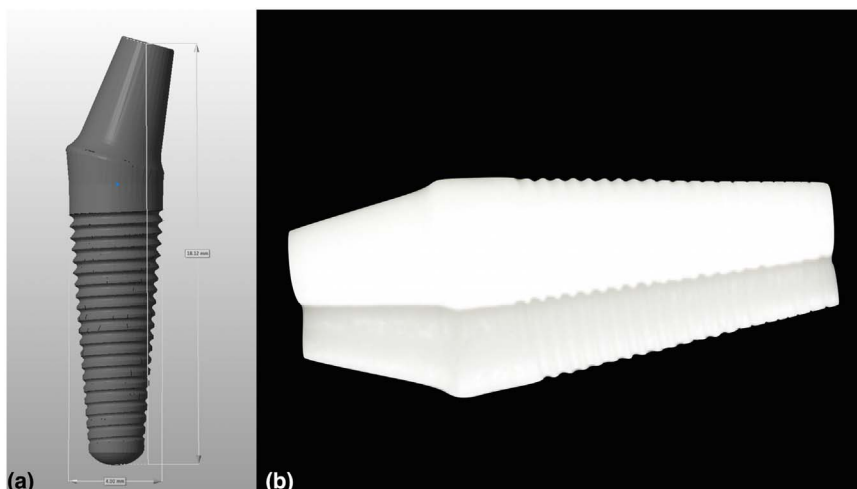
(a) 3D-CAD design of implant, (b) Printed zirconia implant.
